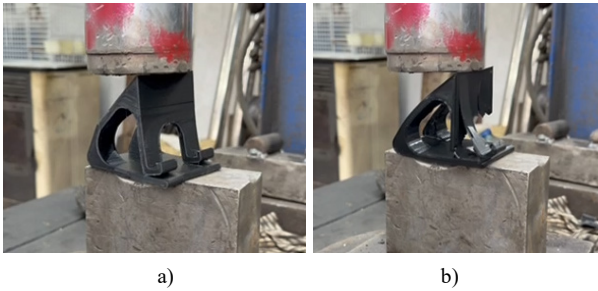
Mechanical strength testing of the smartphone holder under a hydraulic press: (a) horizontally printed specimen; (b) vertically printed specimen.
